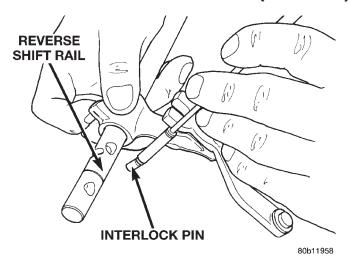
Remove Interlock Pin From Reverse Shift Rail
